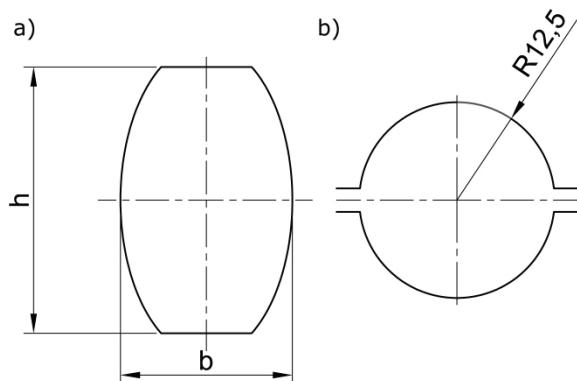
Dimensions a) mill feedstock b) roll pass.
